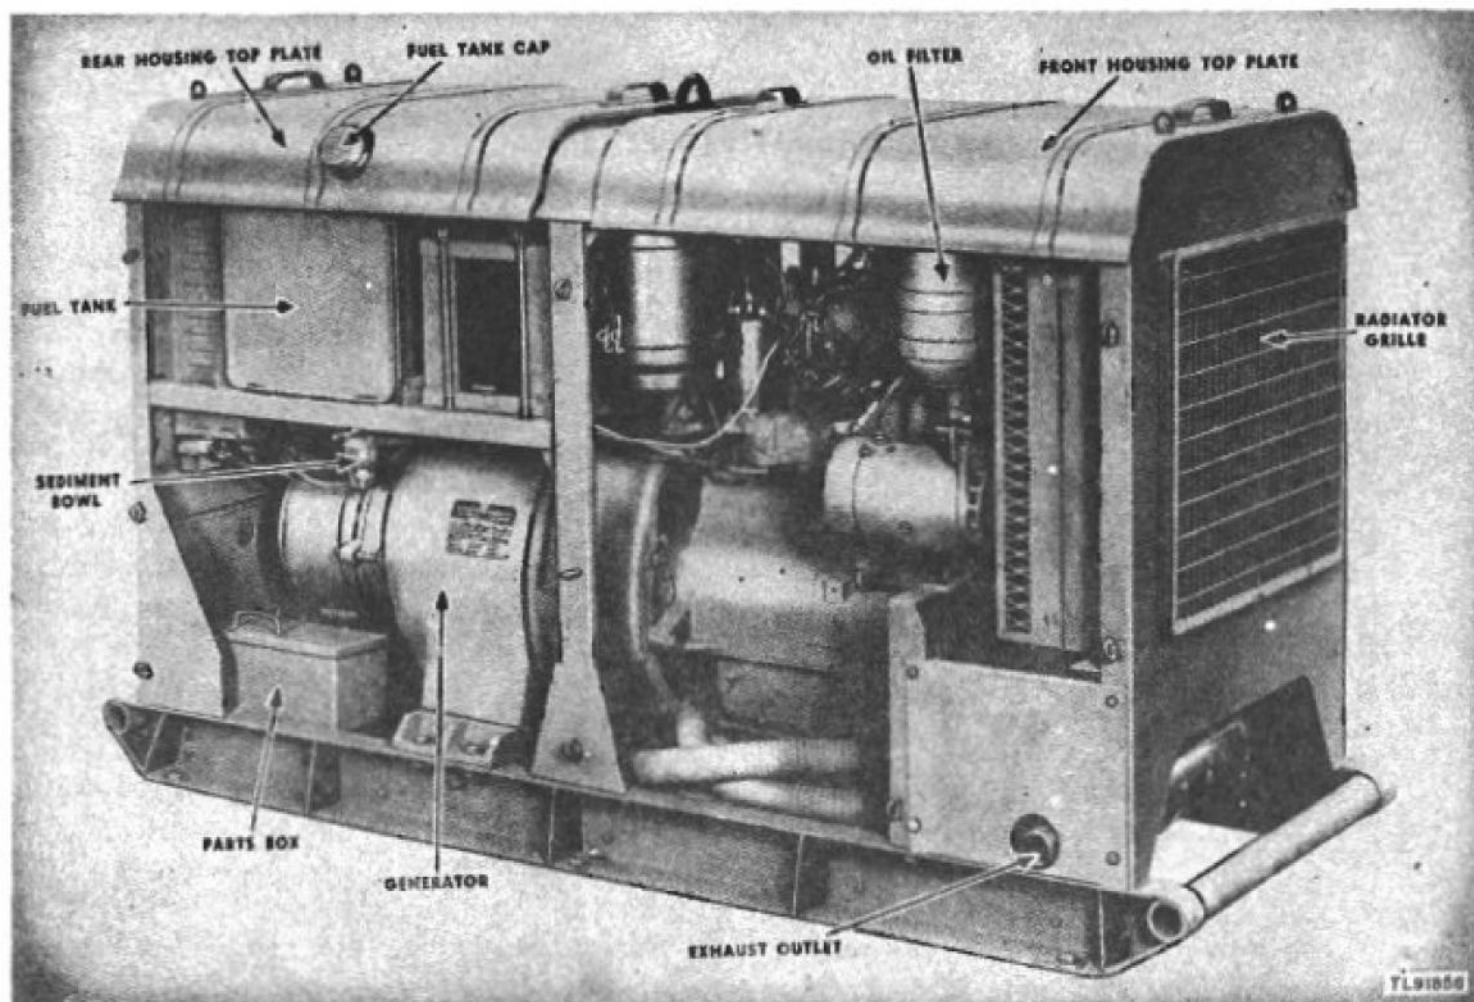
Power Unit PE-95-(2), left side, panels removed.
